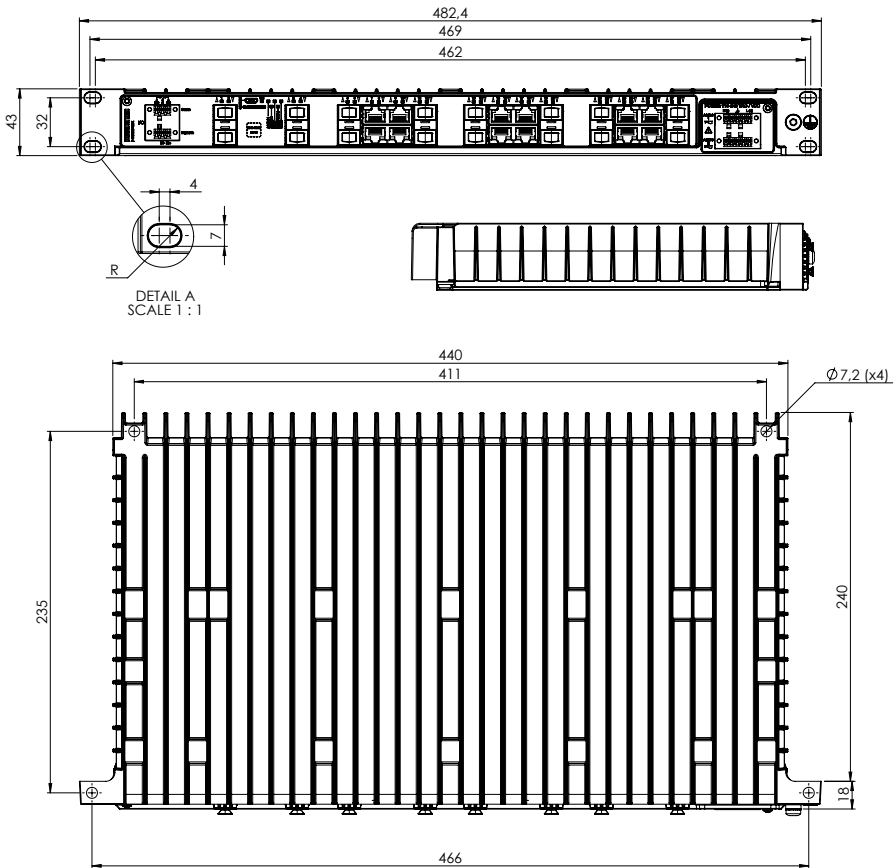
Dimensional drawing, illustrated by a RedFox-5728-F16G-T12G-HVHV
